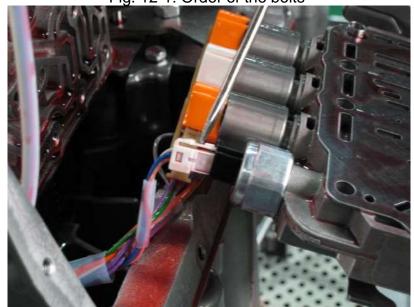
Use a screwdriver to separate the 4 connectors
